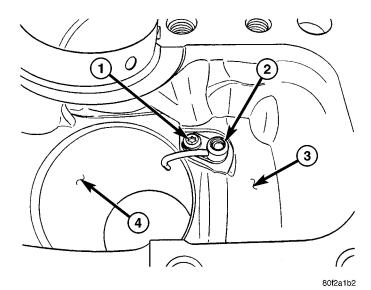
Oil Jet Fastener - 2.4L Turbo
